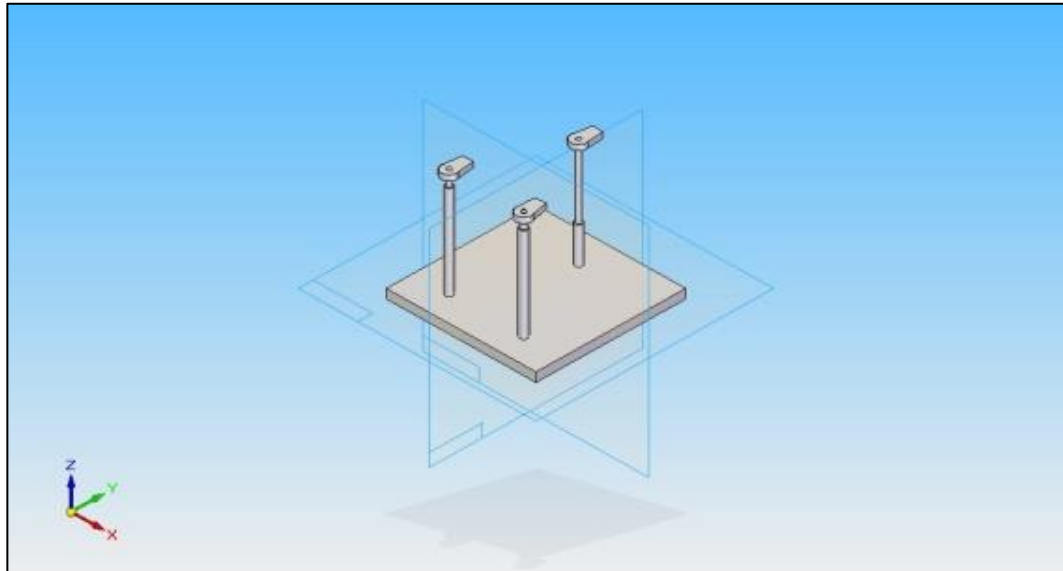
Model of Fixture for CP1 Fuel Pump Housing.
